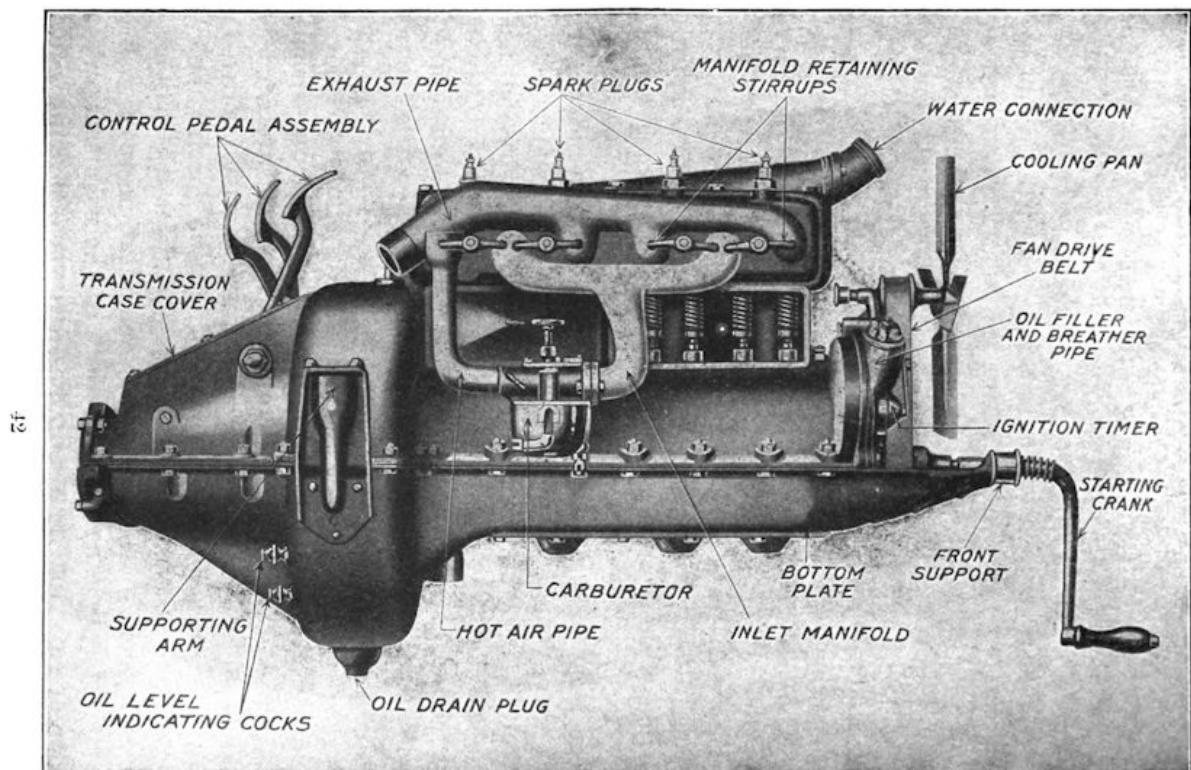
Valve Side of the Ford Model T Unit Power Plant Showing Manifolds, Carburetor and Interior of One of the Valve Spring Chambers.
